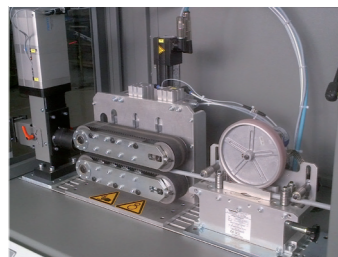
Installation with a calibratable length measuring device, belt feed and pneumatic cable cutter
